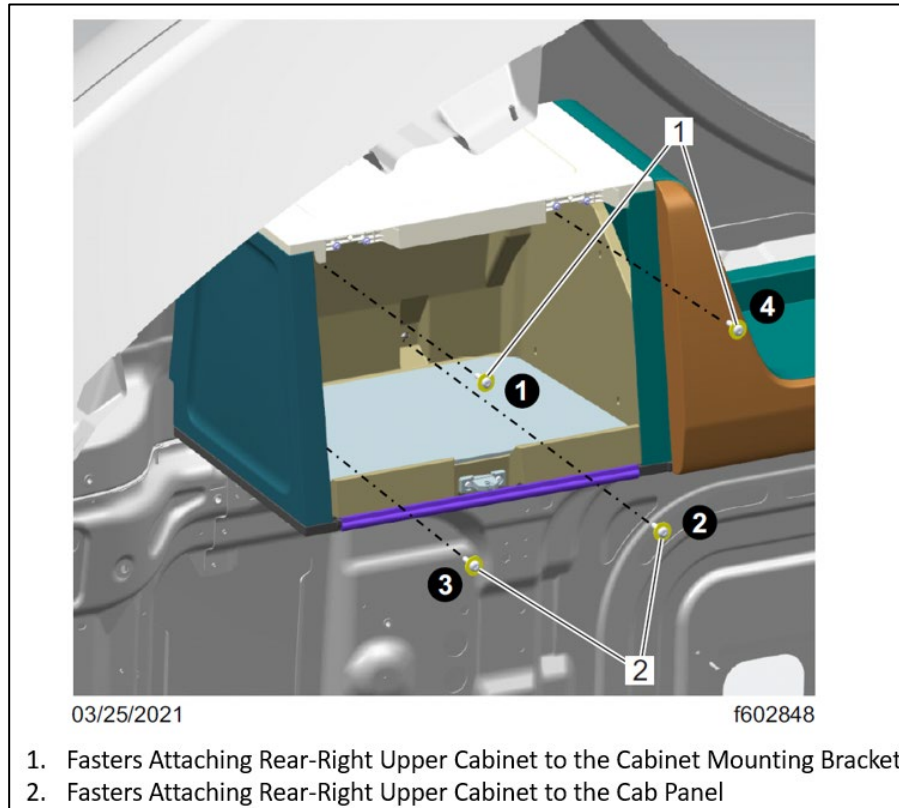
, Fasteners That Attach the Rear-Right Upper Cabinet to the Upper-Rear Shelf and the Cab Panel
